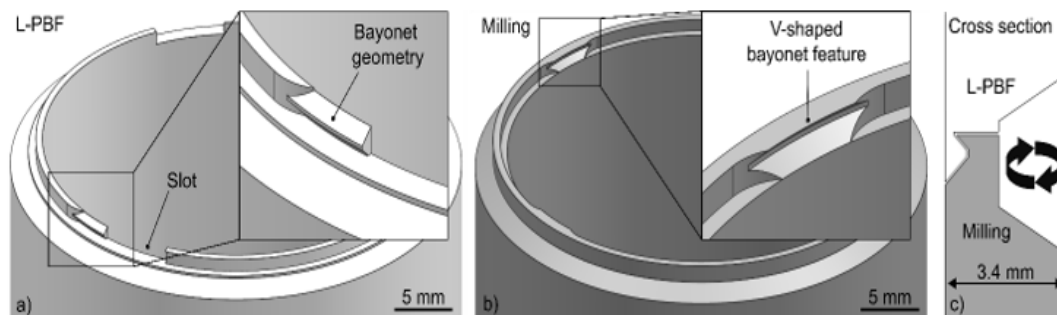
Bayonet design with a) L-PBF geometry (male), b) milling geometry (female), c) schematic assembly design
